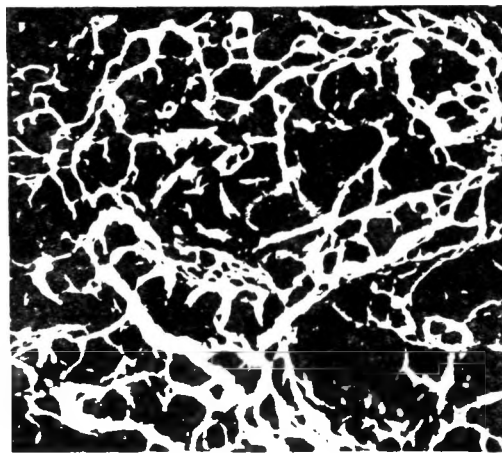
Scanning electron fractograph of fusion zone tensile sample in the as-welded condition (1280X)
